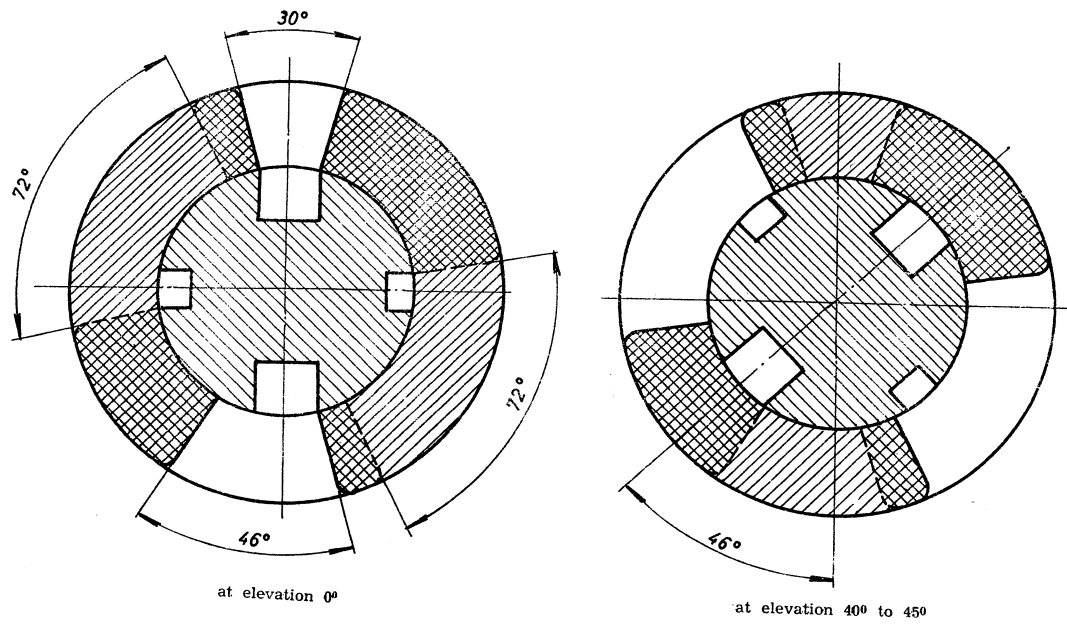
CORRECT POSITION OF THE COUNTER PISTON ROD
